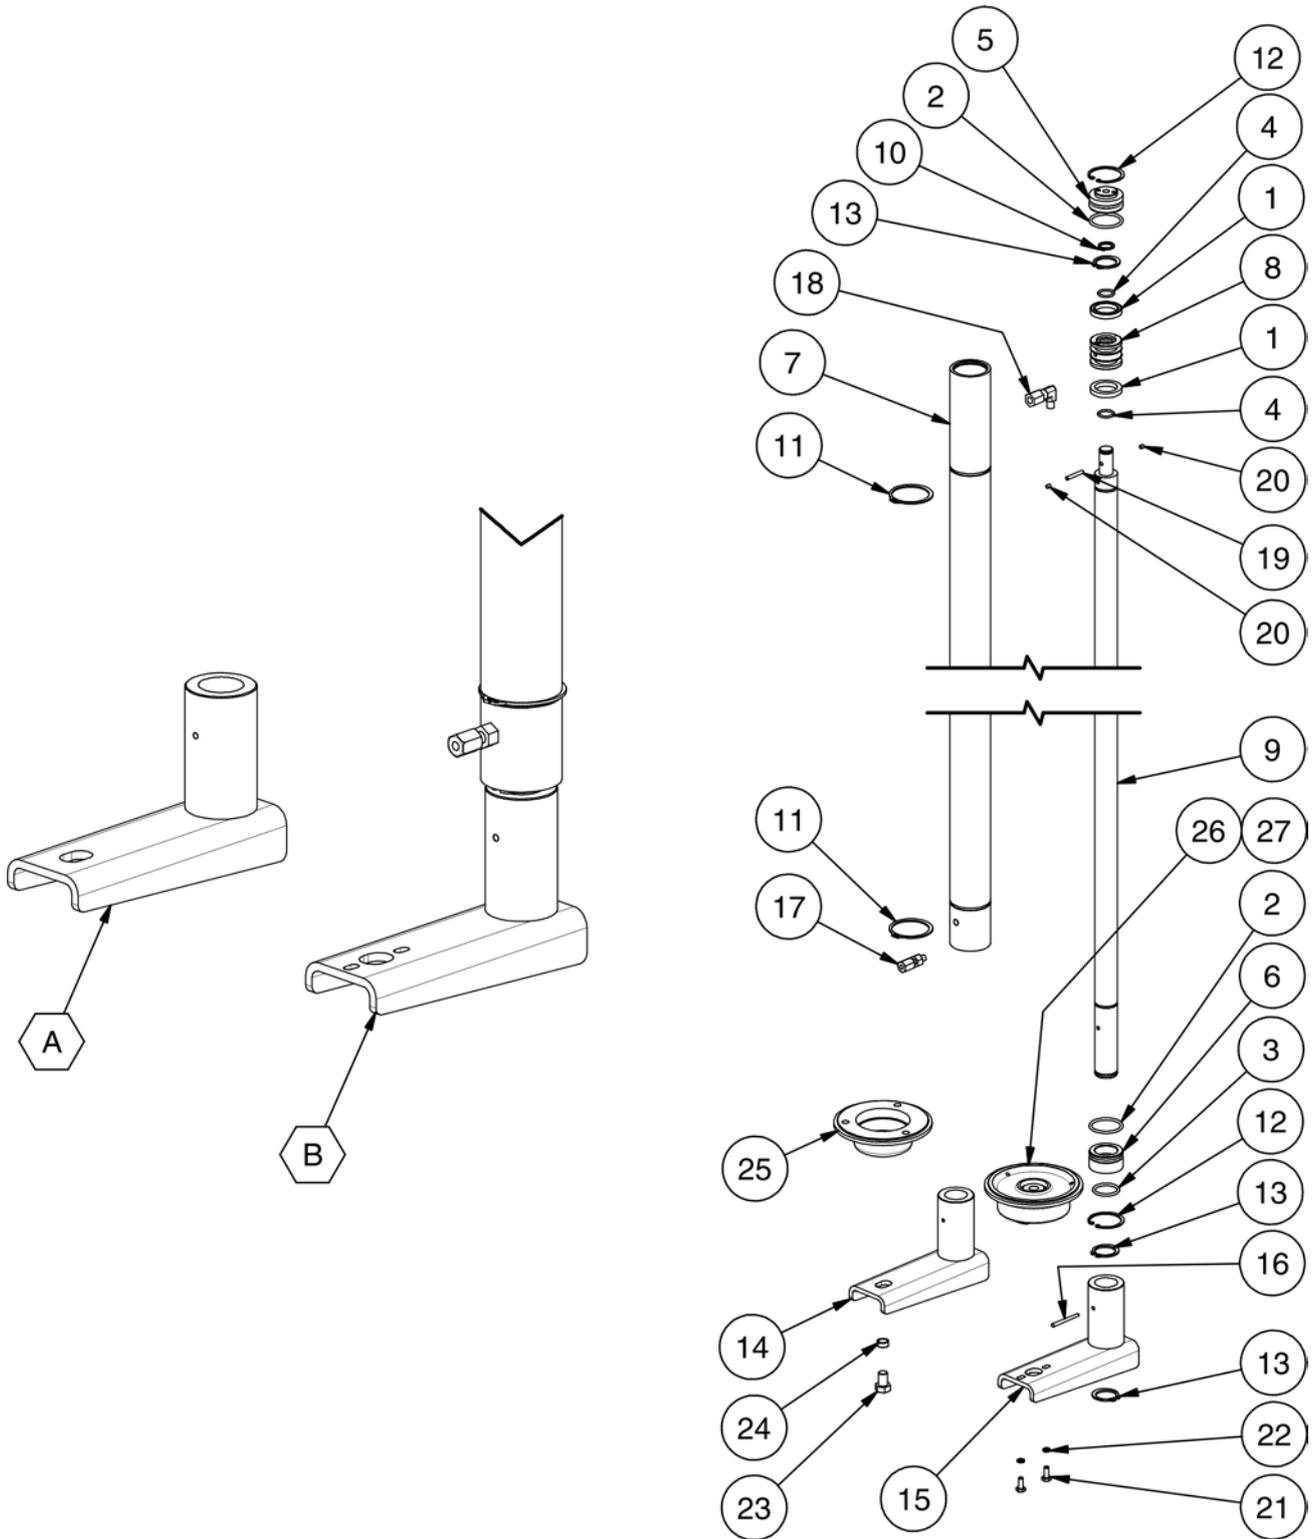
B . CONTHERM™ Hydraulic Lift Assembly With Hold Down
